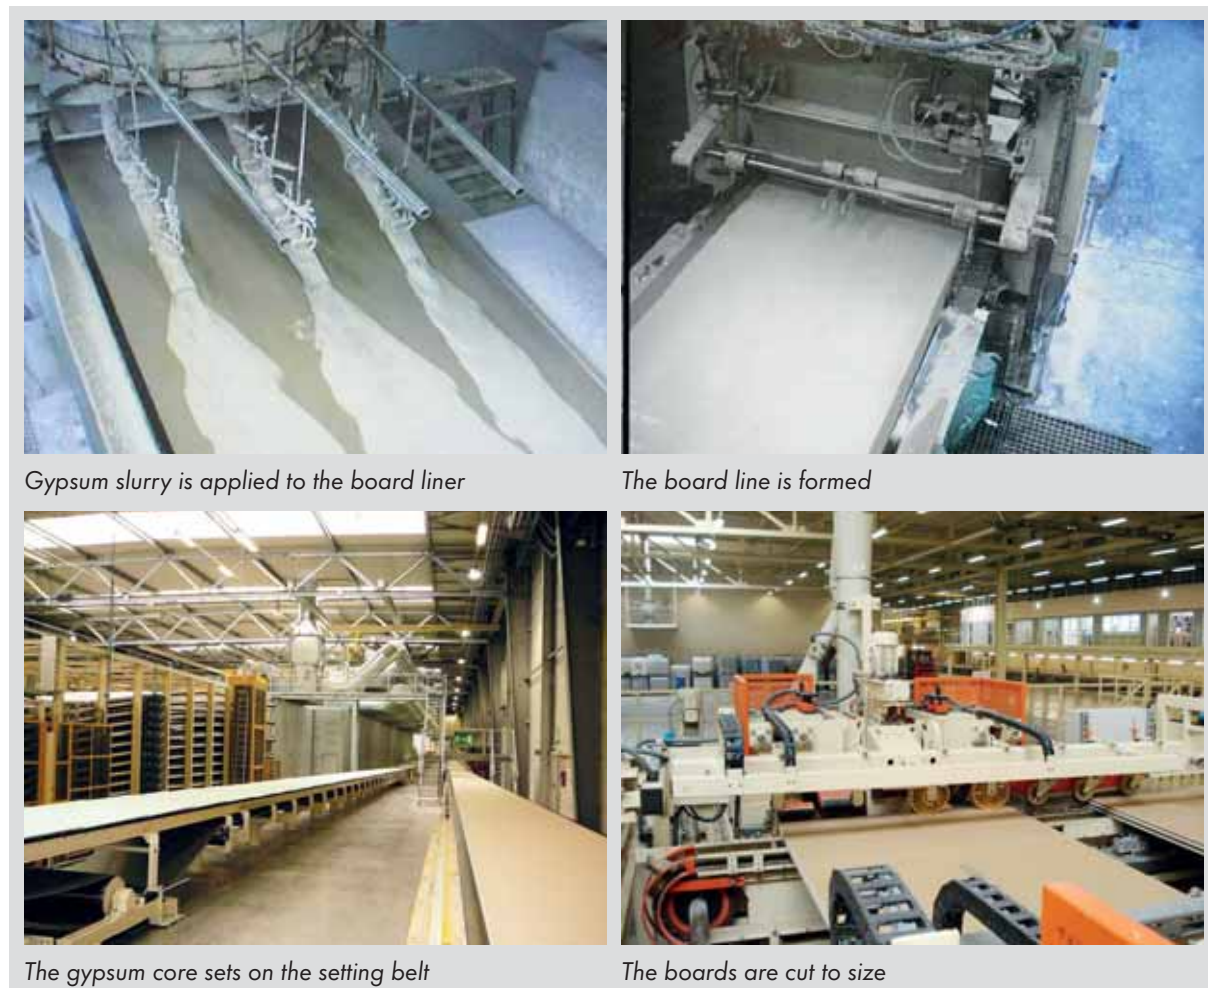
Manufacture of gypsum boards in highly efficient manufacturing plants /Knauf Gips KG/
